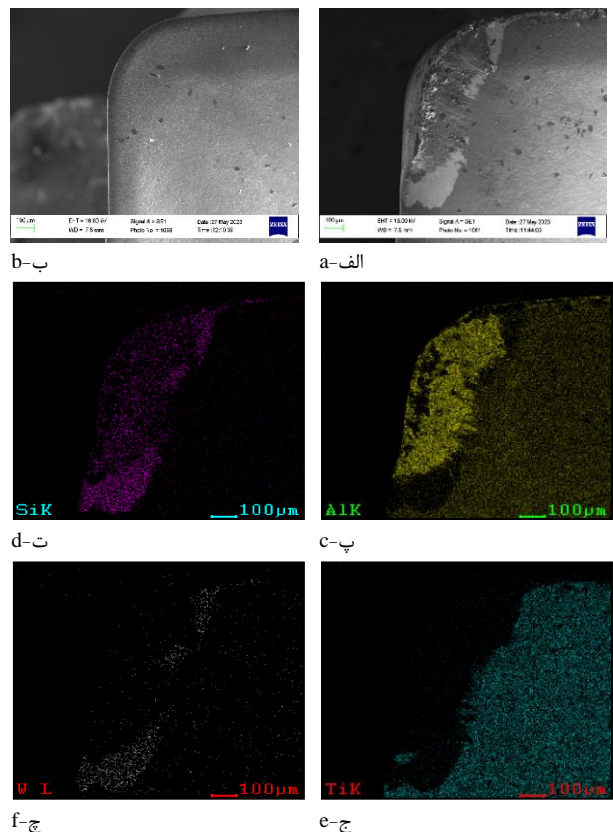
SEM image and surface map analysis of the cutting tool in cryogenic mode at cutting speed of 120 m/min; (a) before machining; (b) after machining; mapping analysis with presence of (c) Aluminium; (d) Silicon; (e) Titanium; (f) Tungsten
